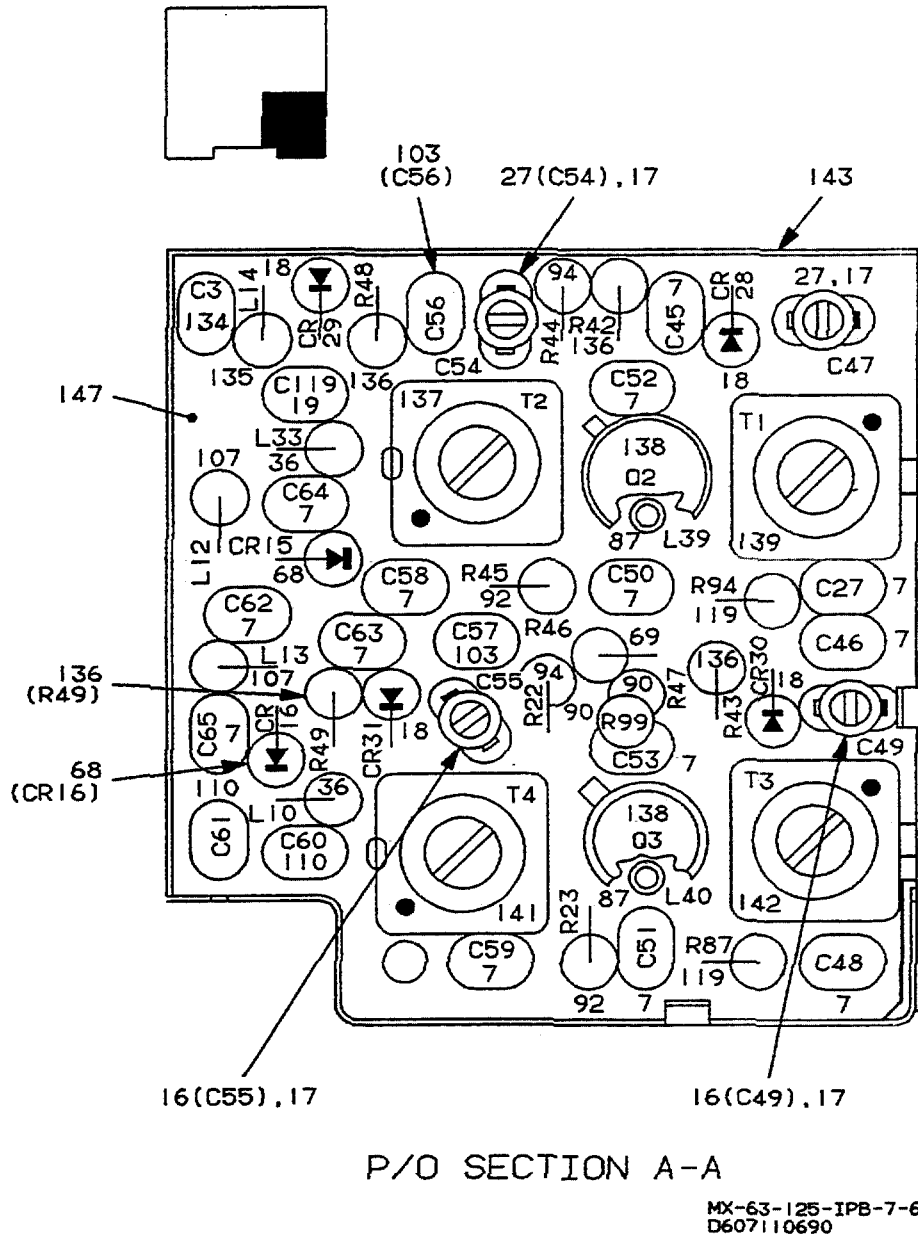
Low Band RF/IF Module Assembly (Sheet 6 of 7)
